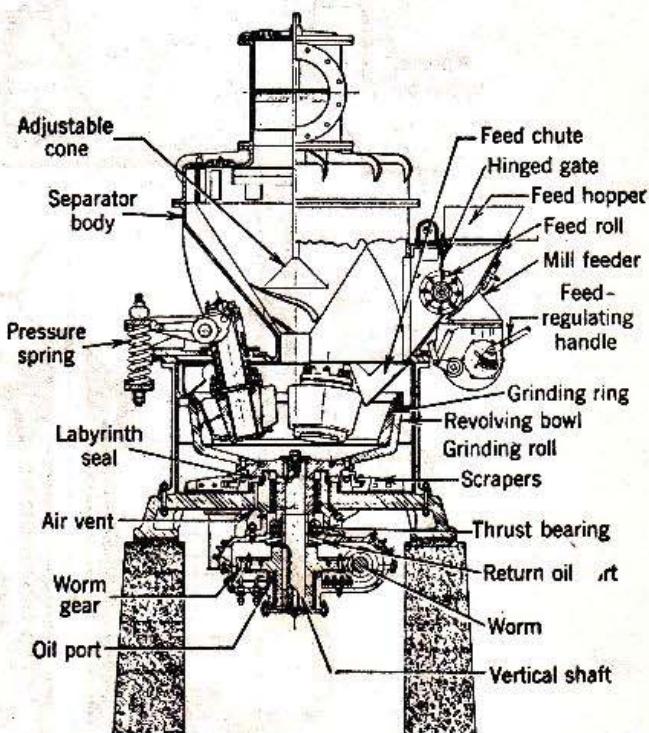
Cutaway and sectional diagram of bowl mill with air classifier or separator. (*Combustion Engineering Co.*)
